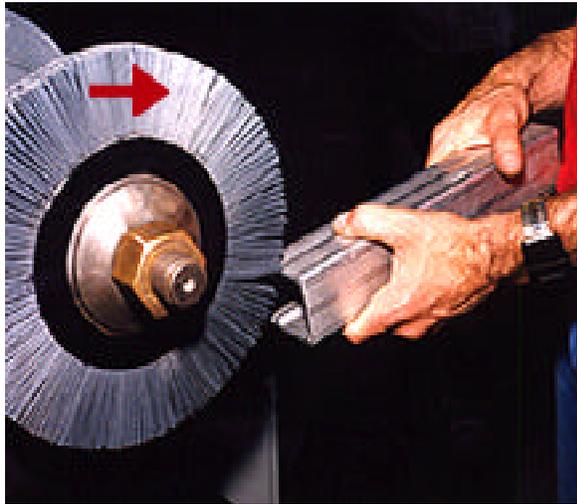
Off-Hand Deburring of an Aluminum Extrusion
